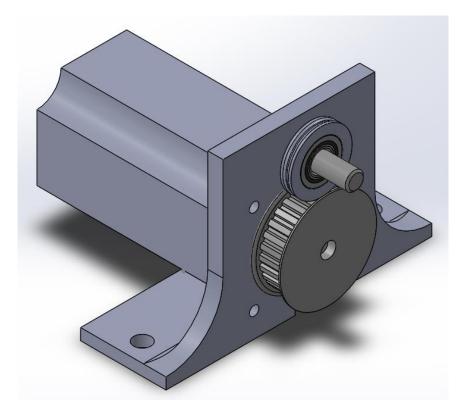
Main Extruder assembly. Note grooved attachment for bearing.
